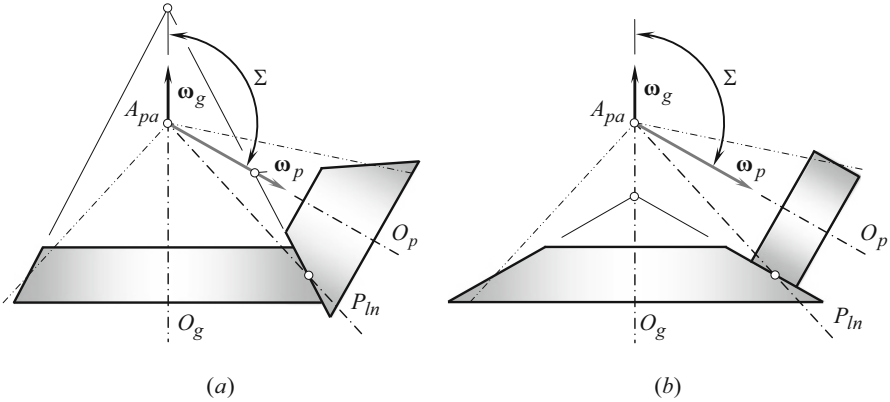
Two examples of gear generic surfaces for external intersected-axes gearing, that feature straight-line axial profiles
